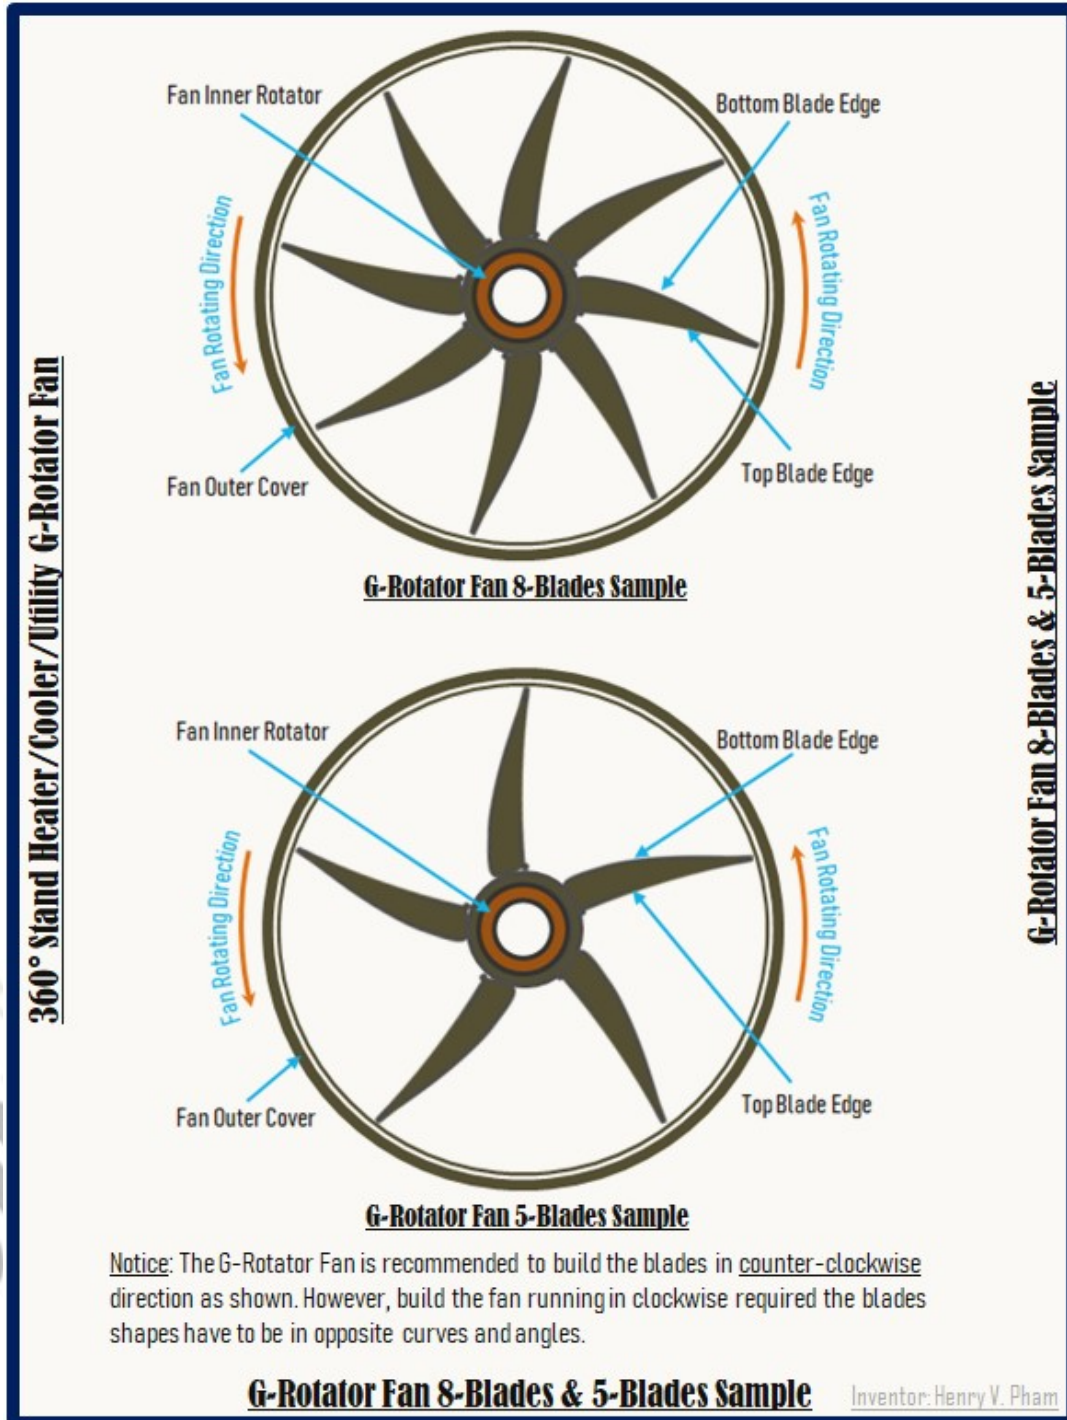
360° Stand G-Rotator Fan -Fan Blades
